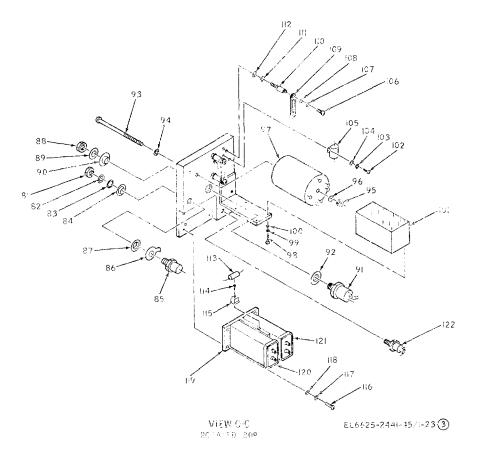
(3). Power Supply 2A1PS1, exploded view (part 2 of 3).
